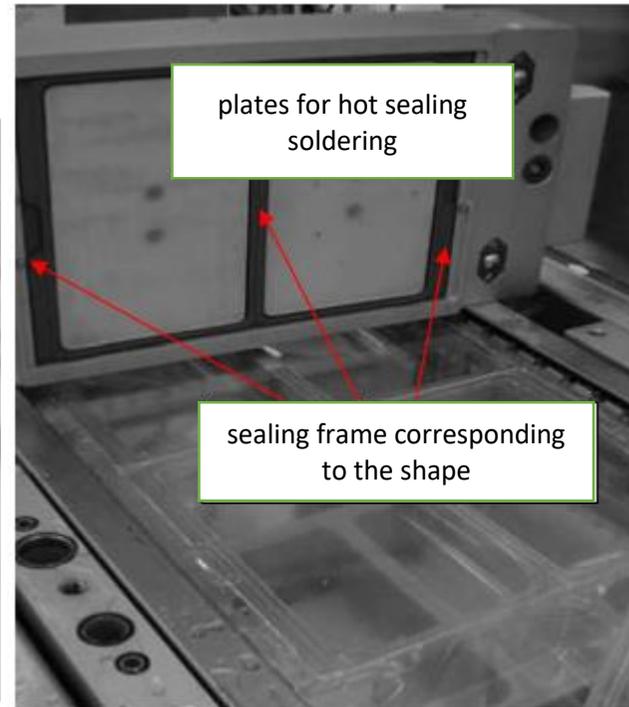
Thermoforming machine<sup>1</sup> (Multivac R230 thermoform fill seal machine)      Fig A2.2 Plastic entry detail
